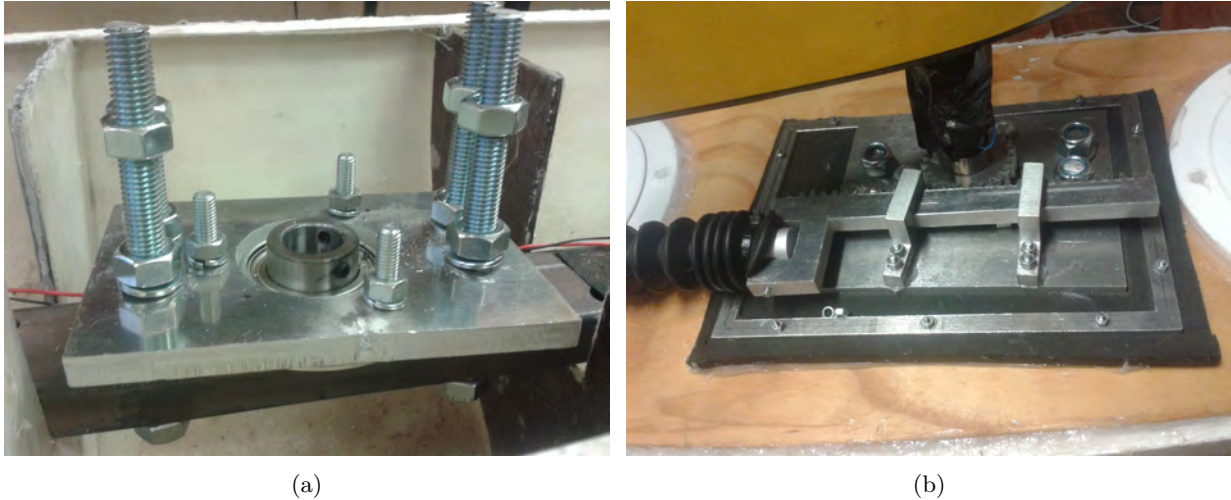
Assembly of the mast step - (a) shows the placement of the lower bracket, while (b) shows the complete assembly including waterproofing.
